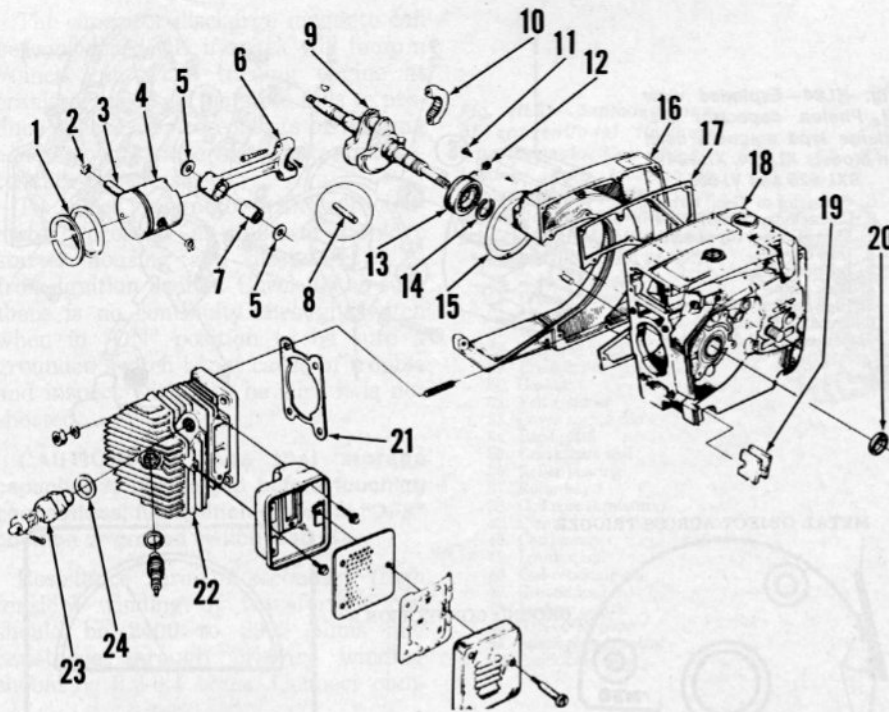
Exploded view of engine assembly. Compression relief valve is used on Models XL-923, XL-924, XL-924W and VI-944.
